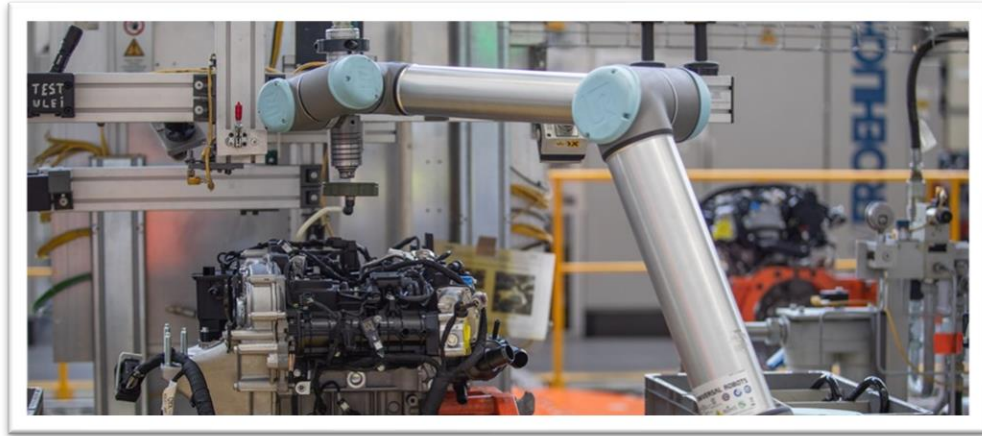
Universal Robot with dispenser end-effector at Ford performing engine greasing shaft [29]
